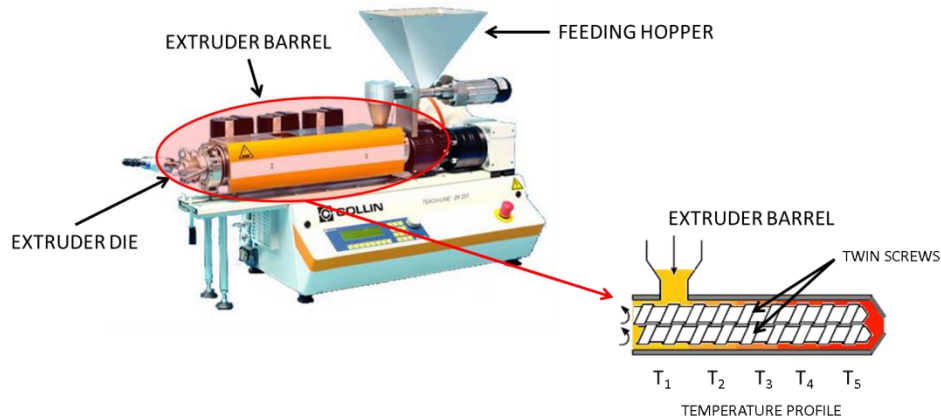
Image of a co-rotating twin-screw extruder including and scheme of the extruder barrel.
